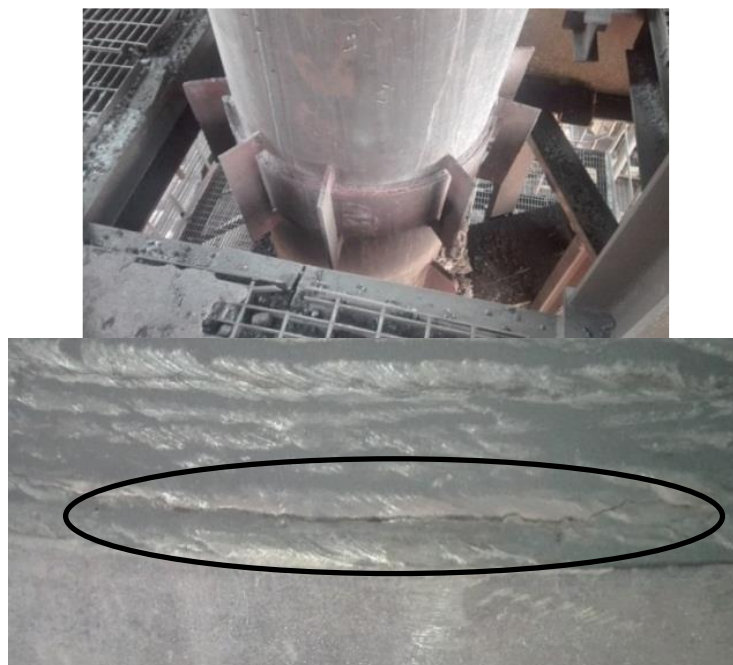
Ring weldment in the leg body and a typical crack initiation in it.
